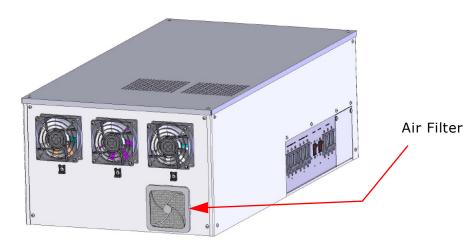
Transformer Enclosure end showing location of air intake filter
